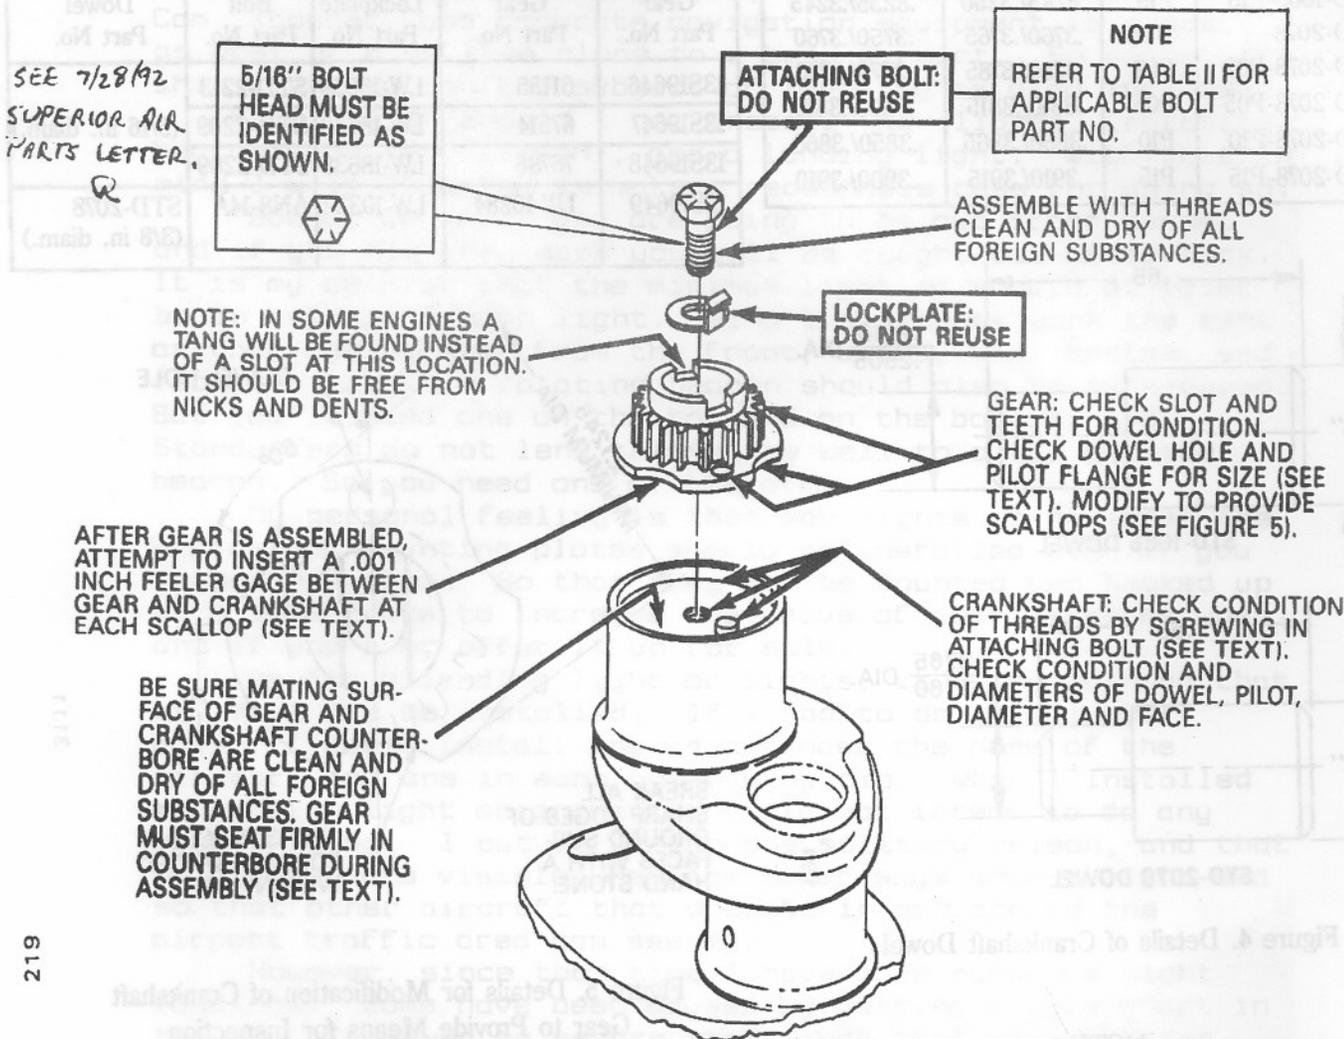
Rear End View of Crankshaft Showing Associated Parts
